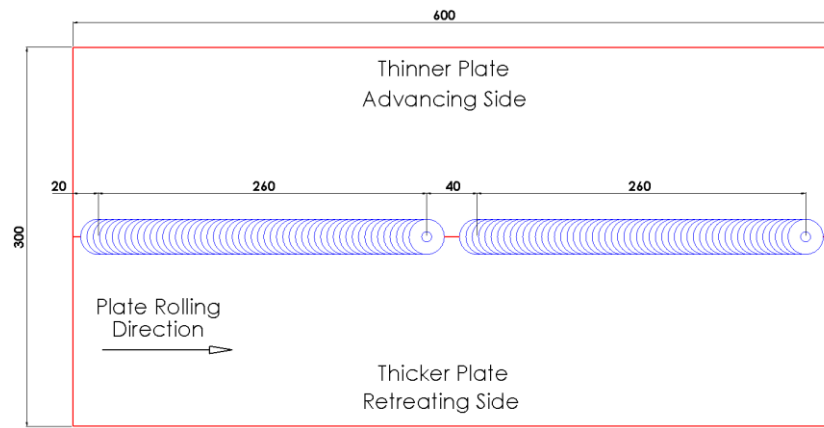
Schematic drawing of the weld sample production.
